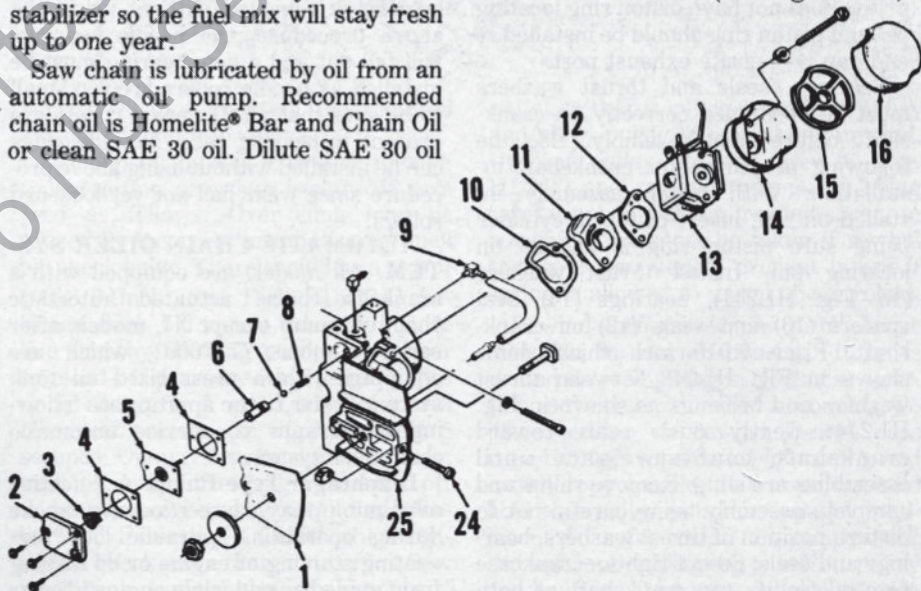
Exploded view of Model XL-2 crankcase and oil pump assemblies. Other models are similar.
